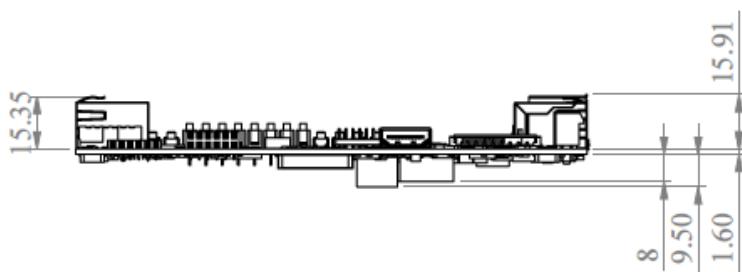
Arria10 SoC/FPGA custom carrier board – Side View
